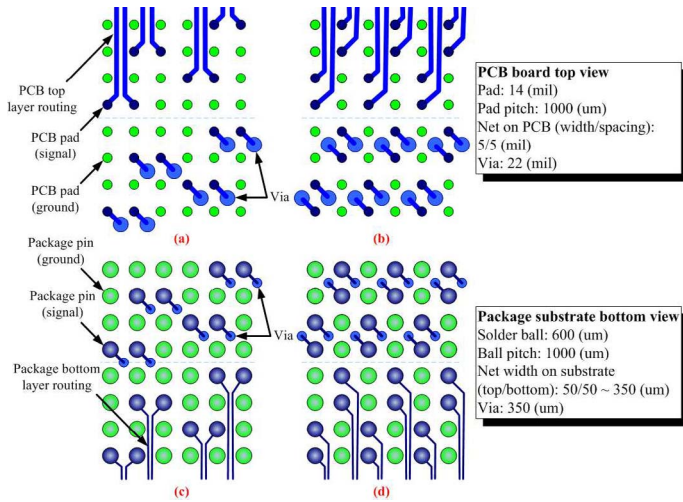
The routing pattern on PCB top layer (a)(b) and package bottom layer (c)(d).
